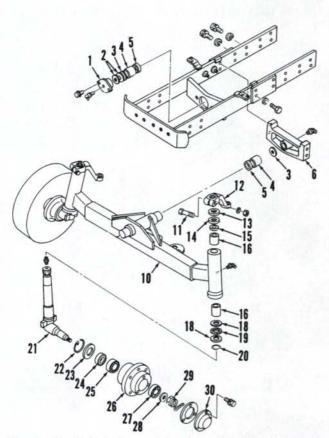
Exploded view of fixed tread width front axle assembly used on Model 1320.
